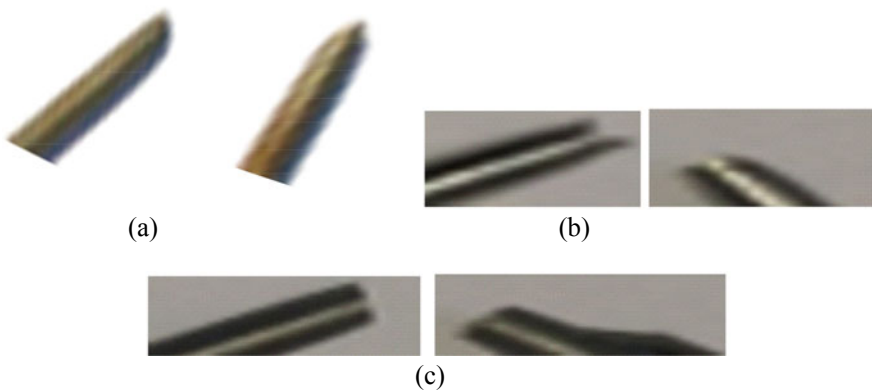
Fractured specimens of a MCS, b Inconel 718, and c D2 cold work steel
